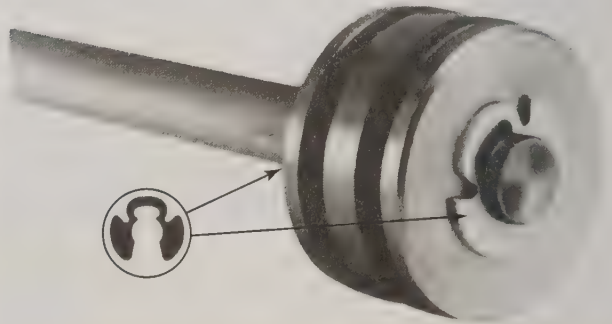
External retaining ring used on a shaft (Rotor Clip Company, Inc.).
